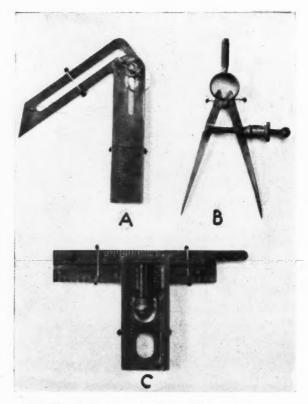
A, Universal bevel: B, Calipers; C, Square.
